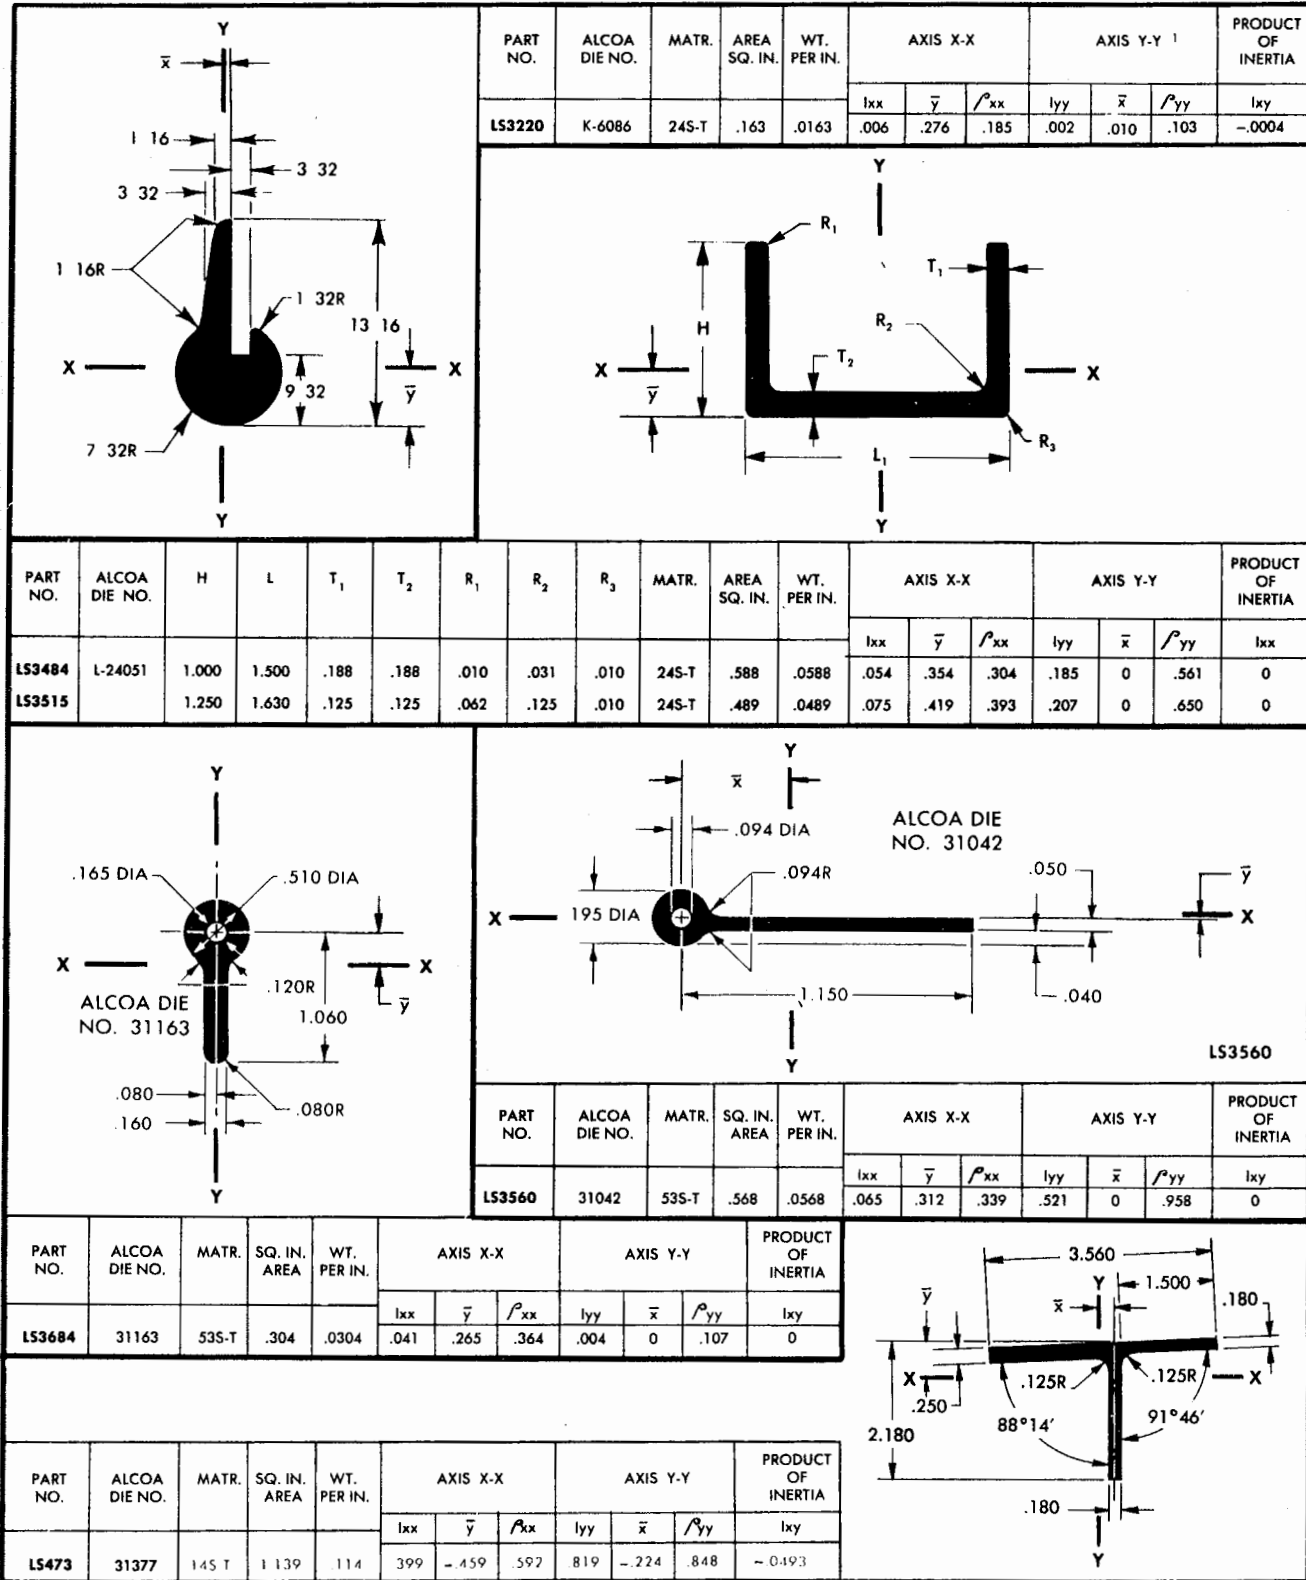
(Sheet 17 of 17 Sheets) — Extruded Standards
